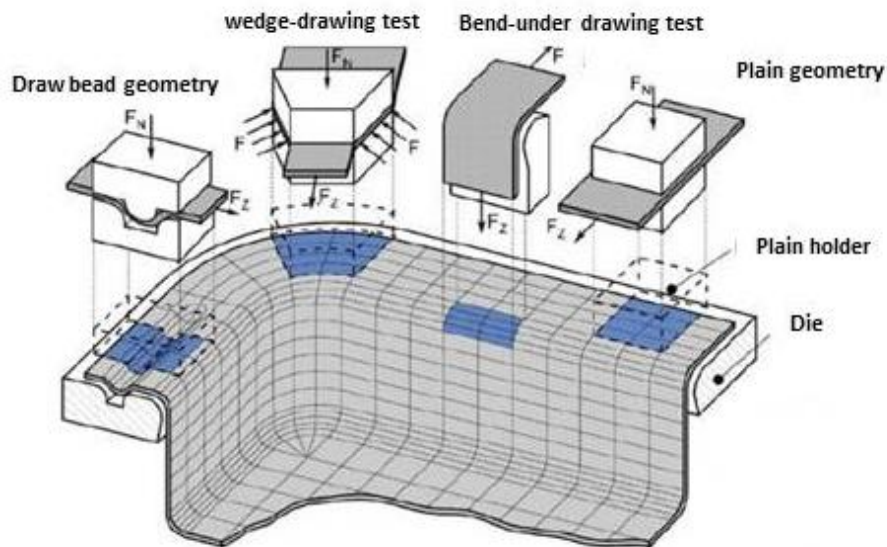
The sliding zones of a deep drawing process and simplified tools for strip drawing tests [NET95]
